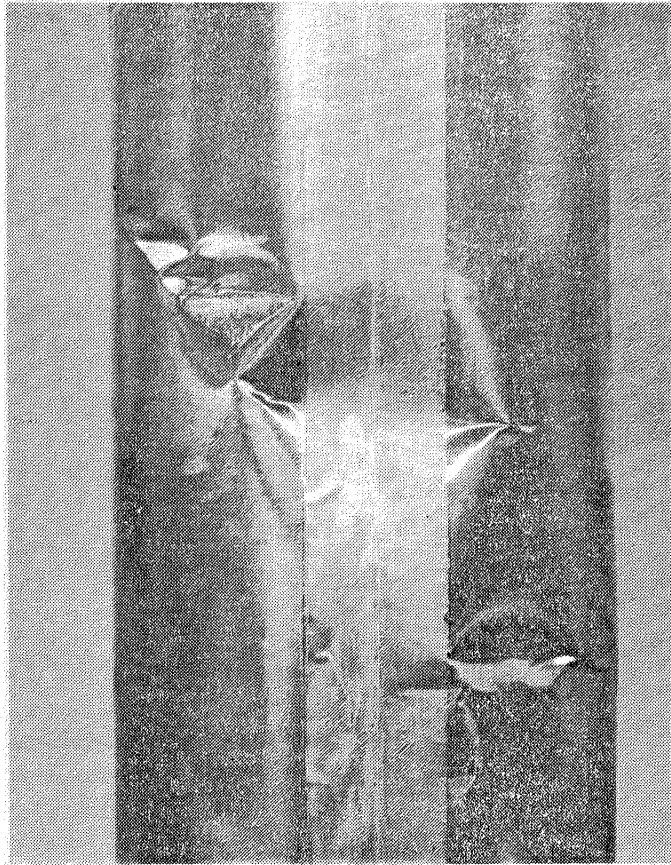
Buckling failure of 0.102 mm aluminum cylinder.
